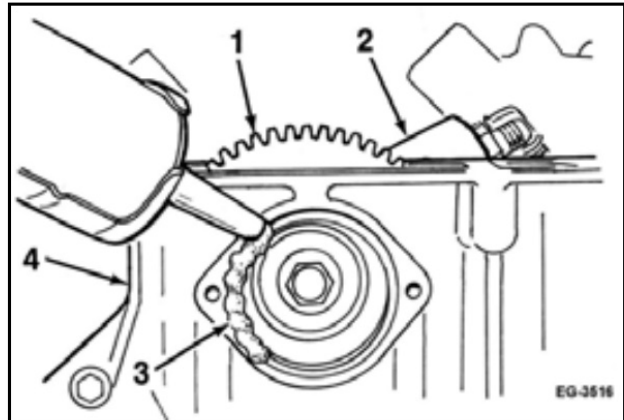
Applying RTV Sealant to the Drive Gear Access Cover
